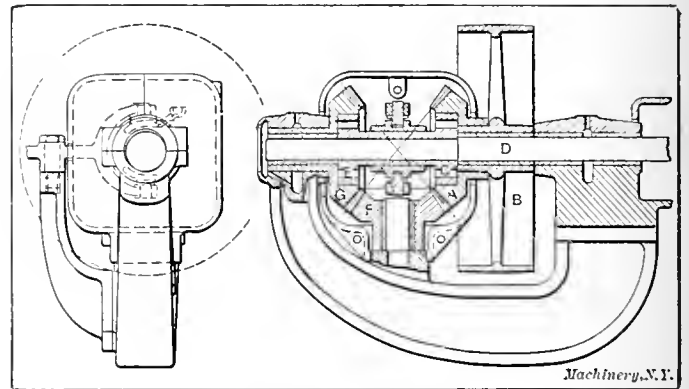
Arrangement of Gearing and Clutches for Reversing
